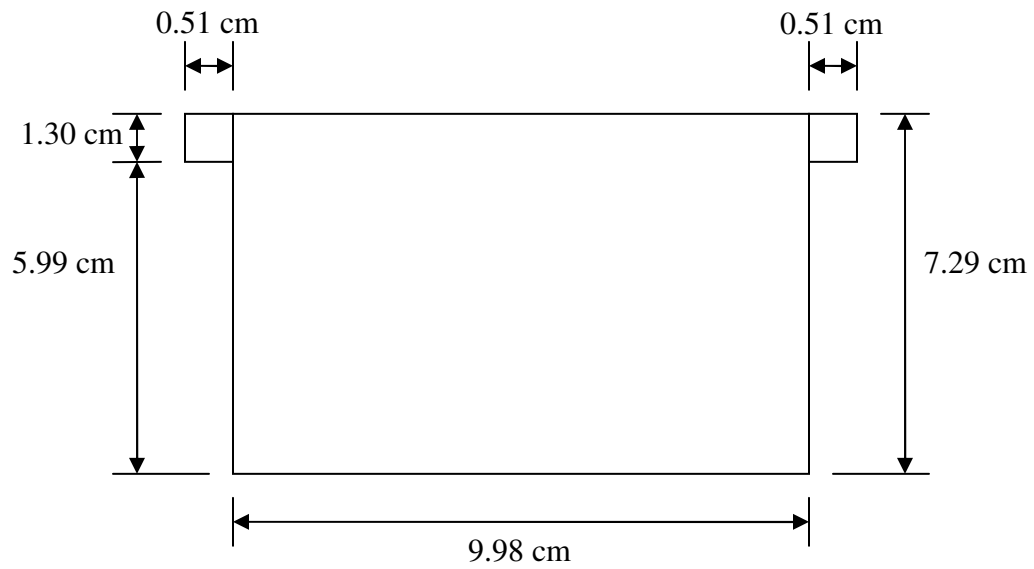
Dimensional drawing of a single stainless steel plate.
